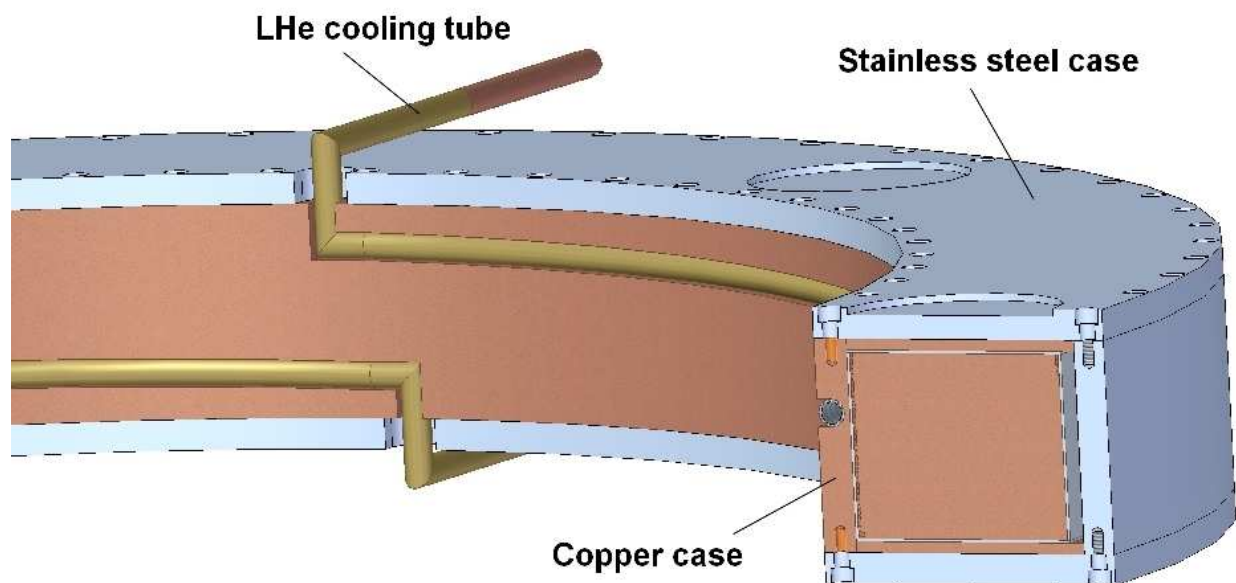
The stainless steel case and the copper case assembled by using bolts.
